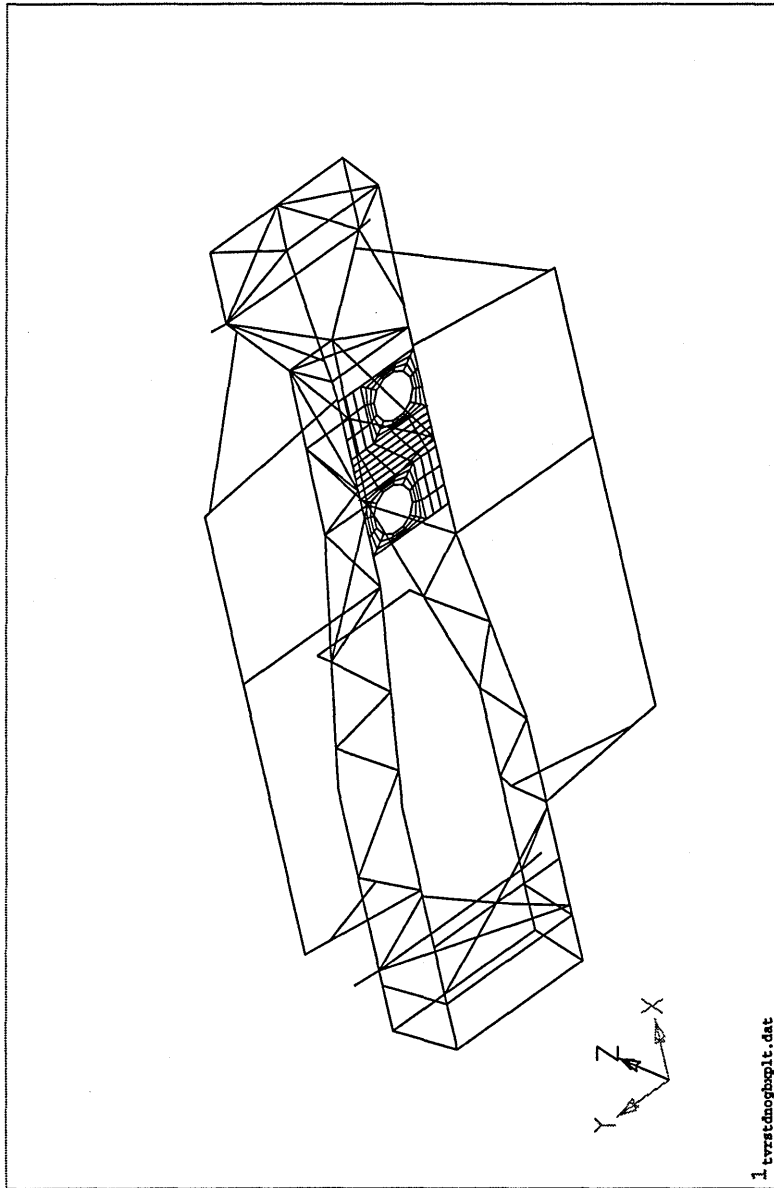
Chimaera Chassis without the gearbox member but with the plate
